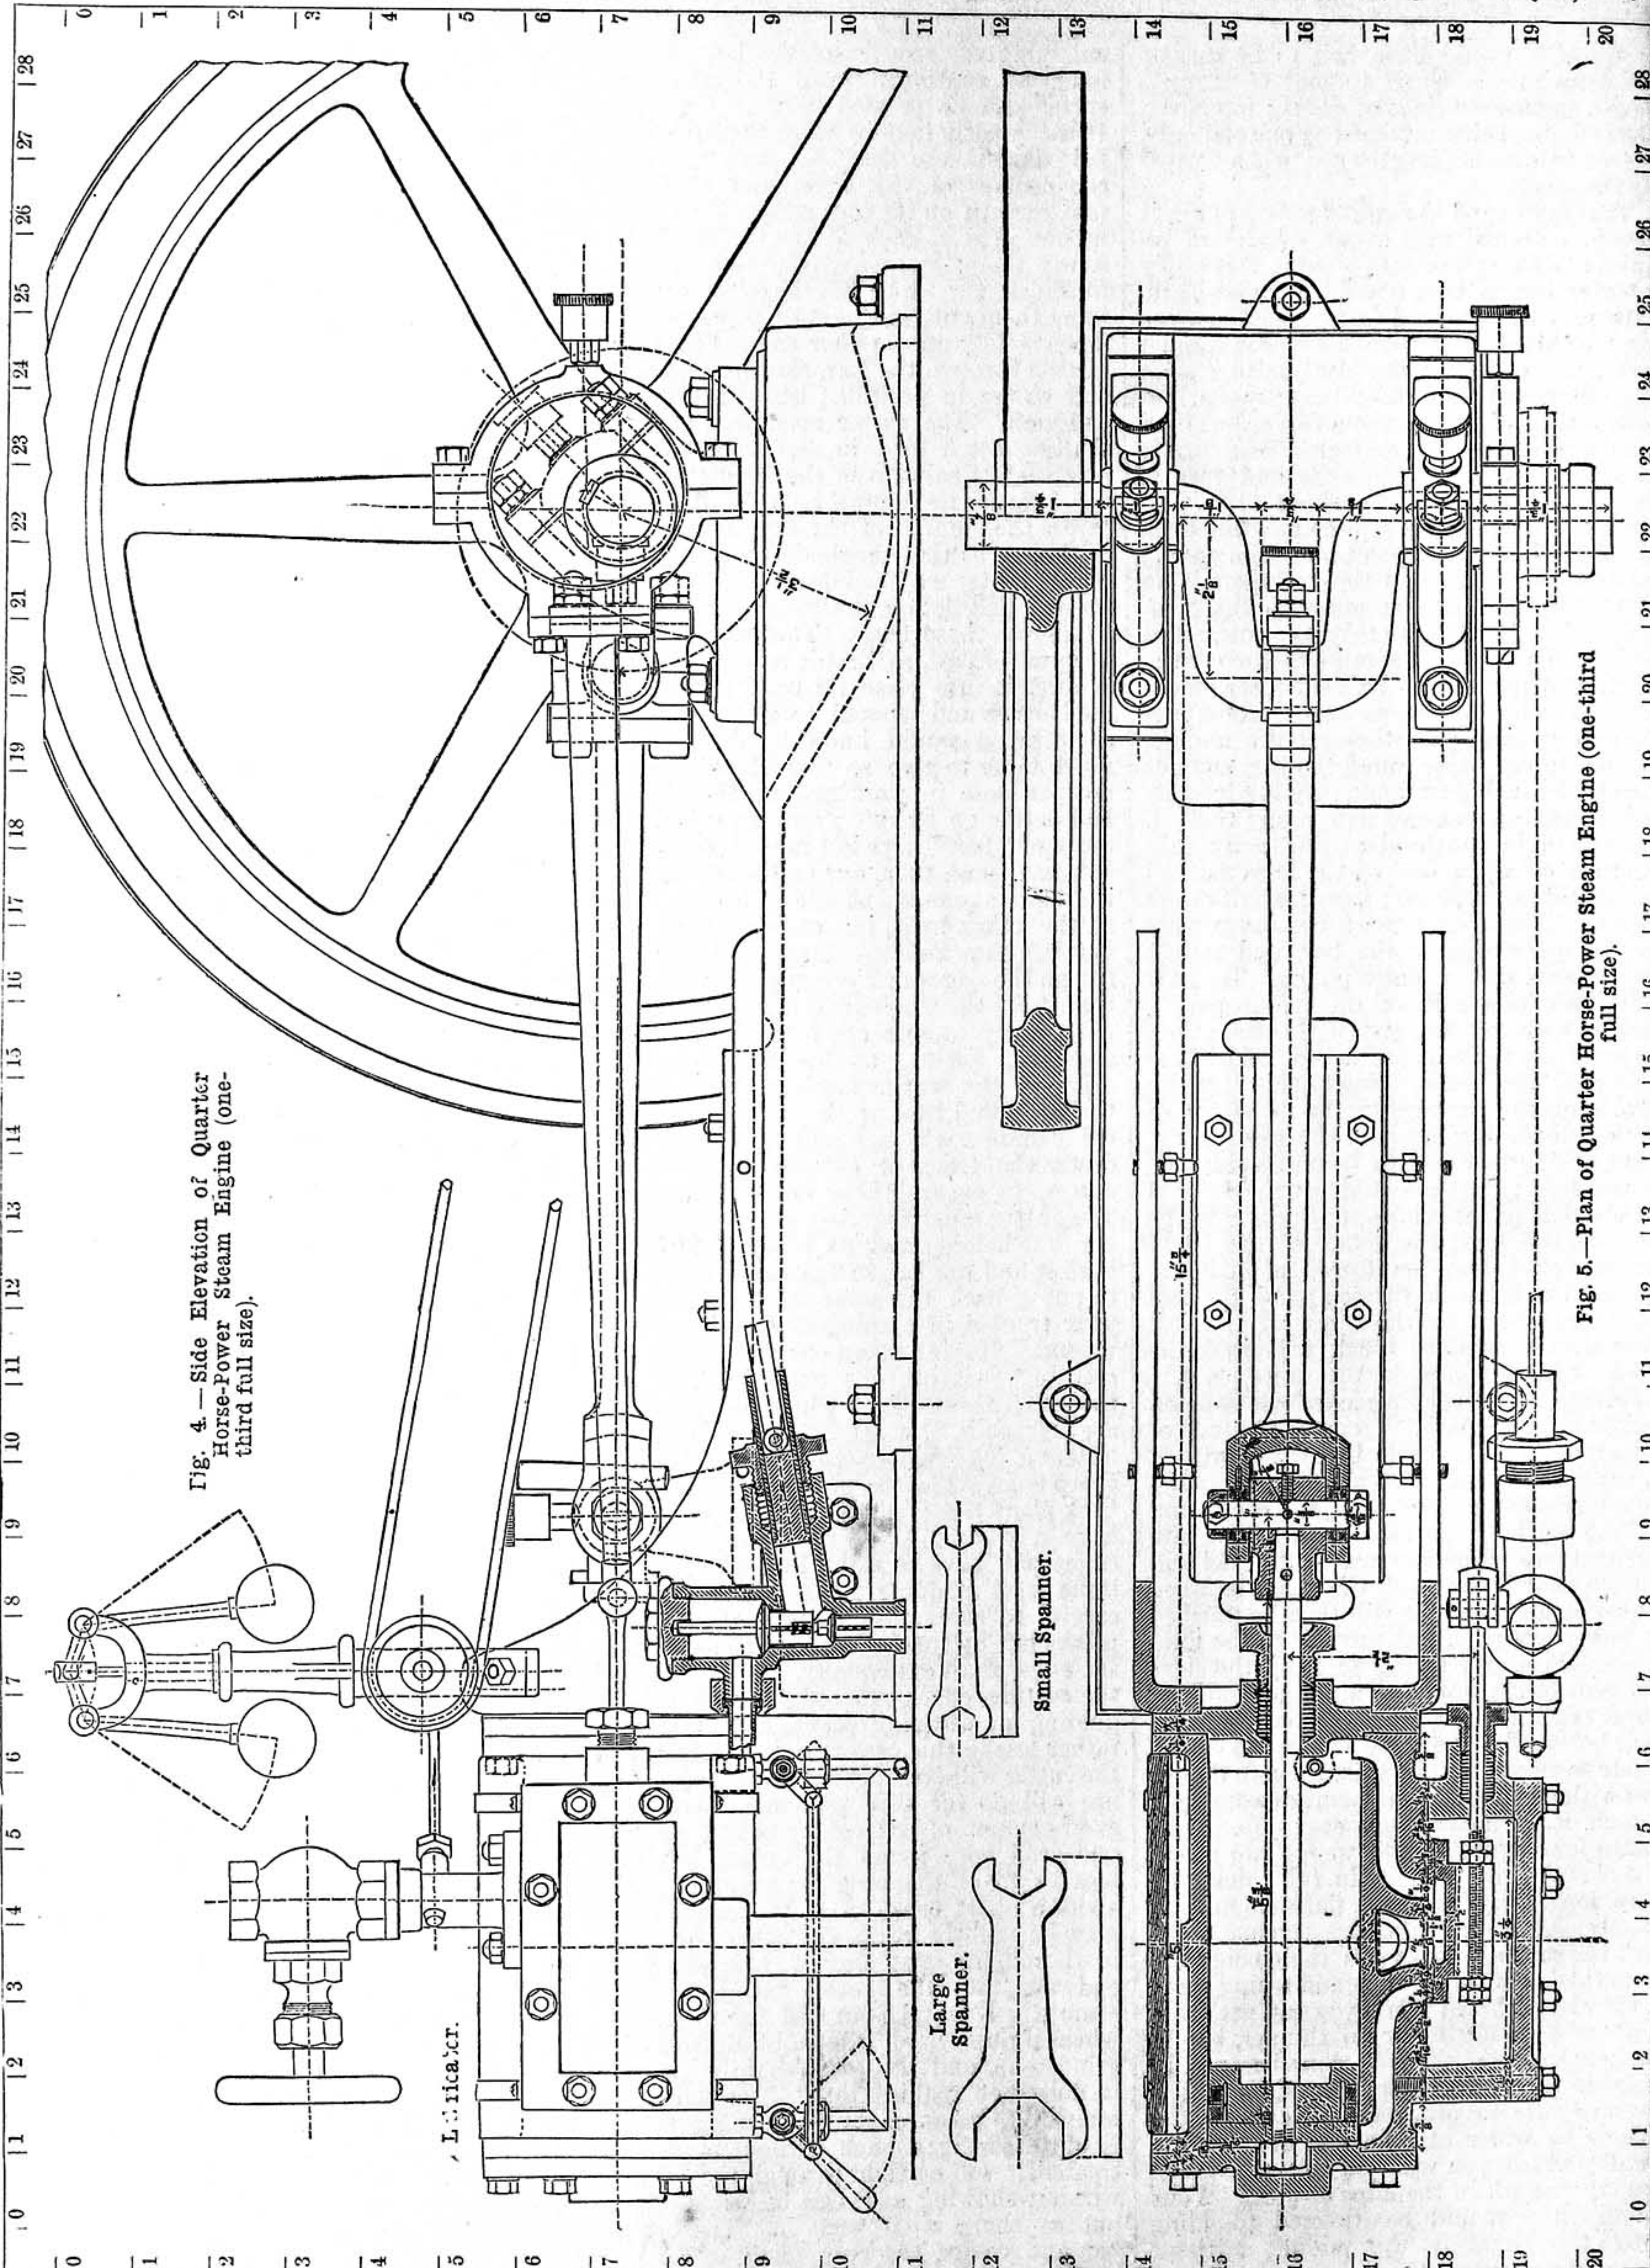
Side Elevation of Quarter Horse-Power Steam Engine (one-third full size).
